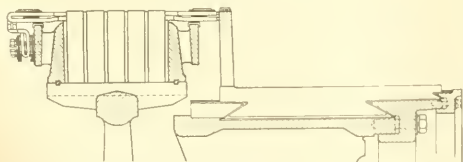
SECTION OF COMMUTATOR SHOWING AUXILIARY V-RING
